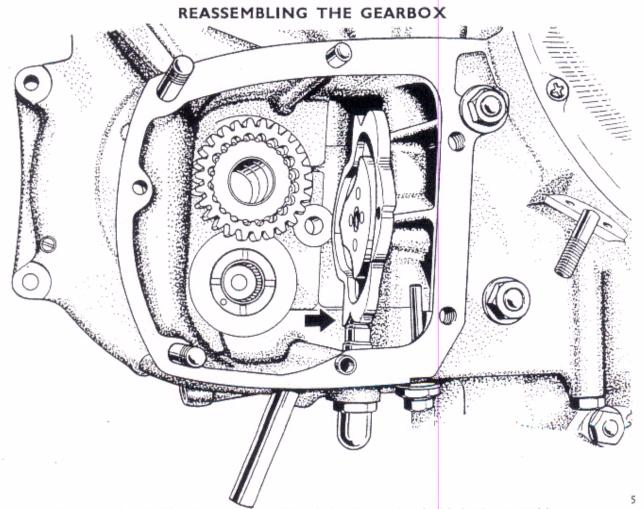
Reassembling the gearbox. Arrow indicates camplate in 4th (top) gear position
